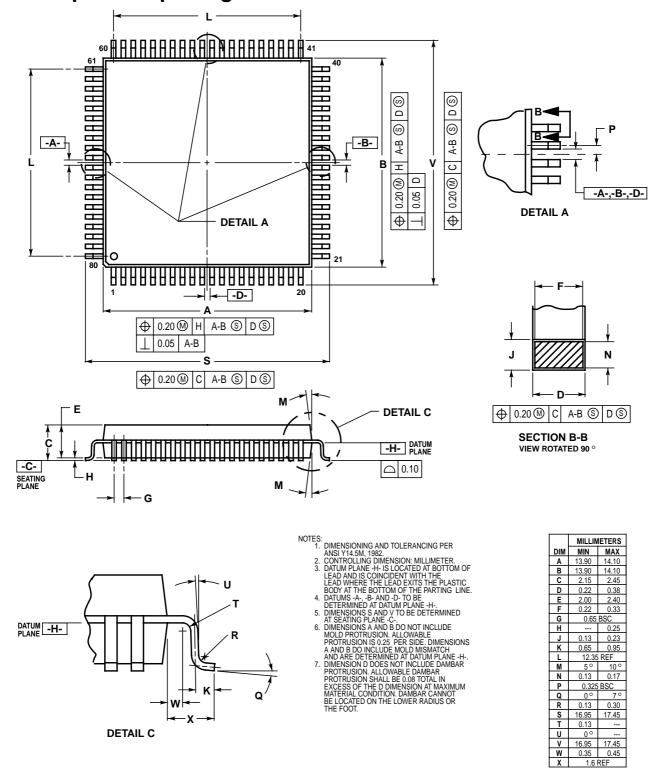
80-pin QFP Mechanical Dimensions (case no. 841B)
